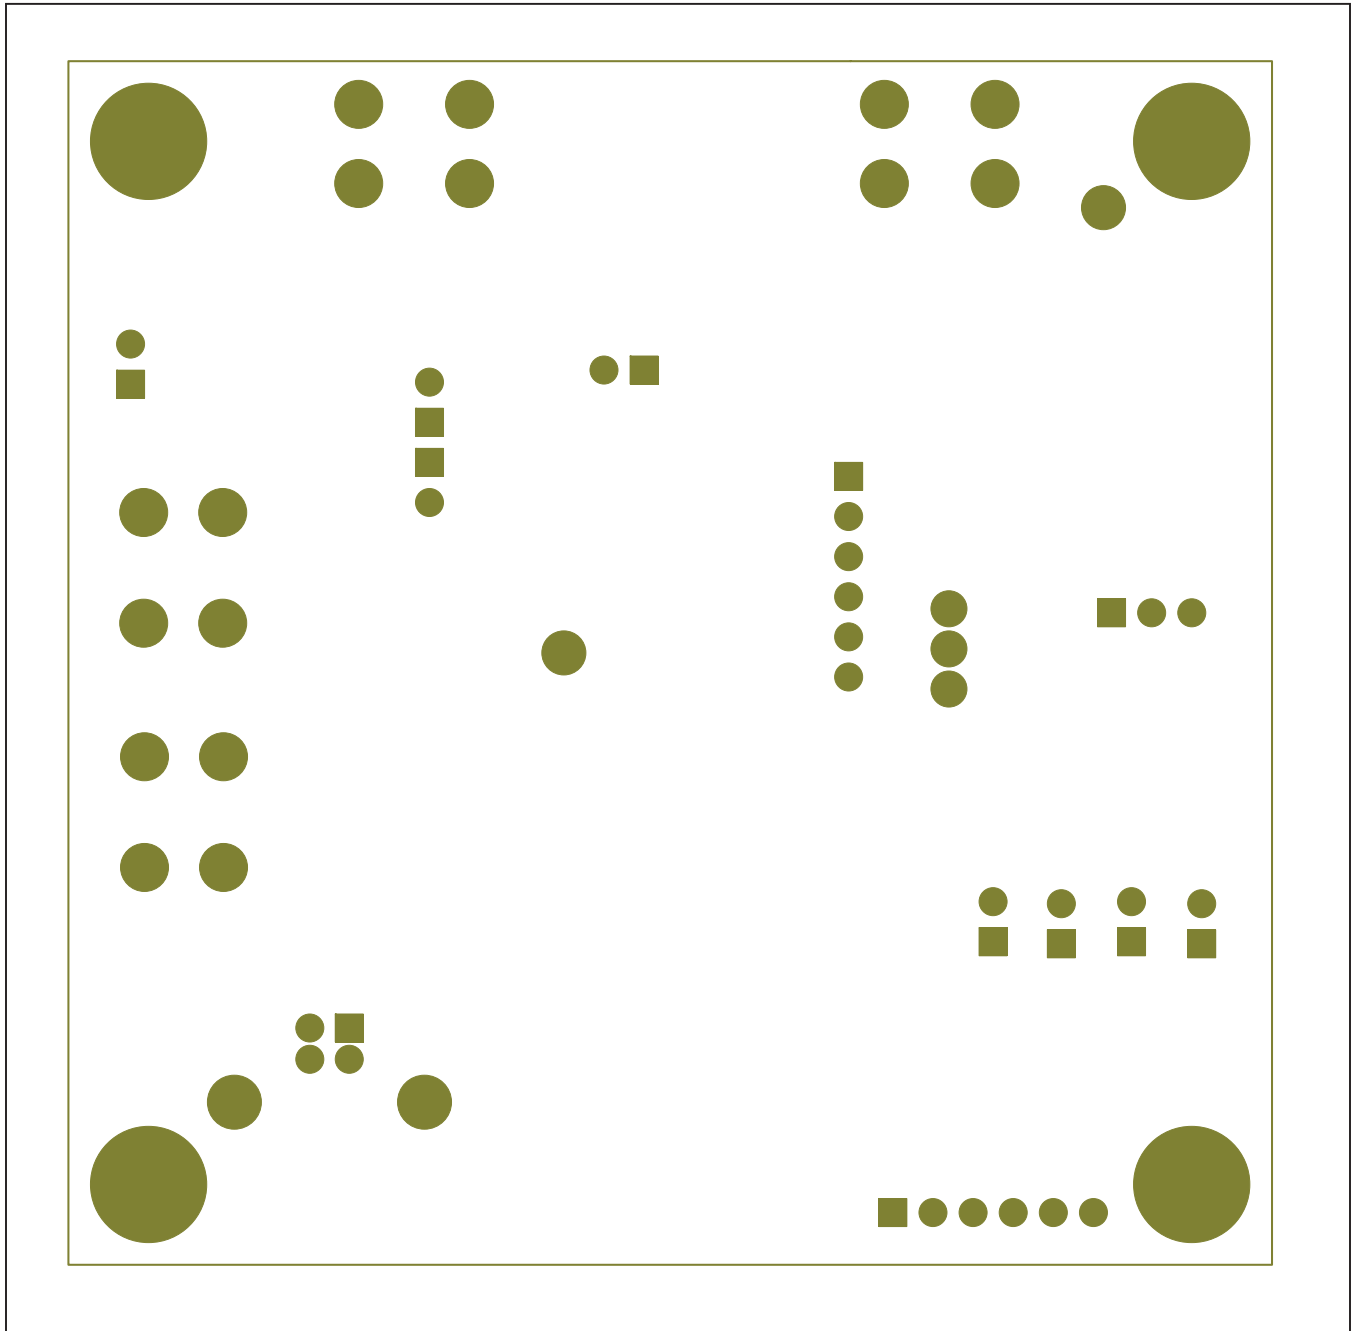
MAX71020A EV Board Layout—Bottom Soldermask
